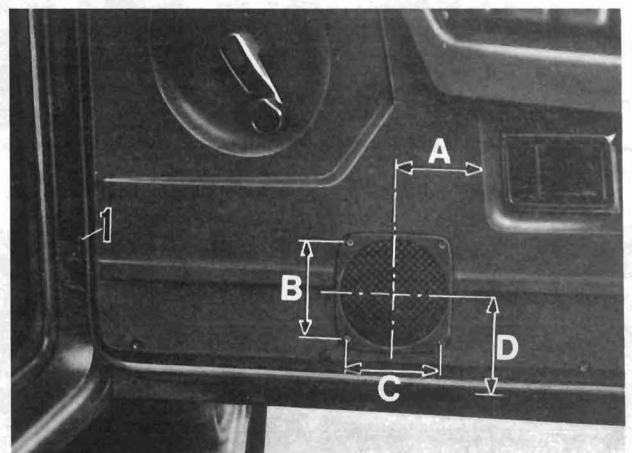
Speaker mounting on Coupe door (Sec 24)
